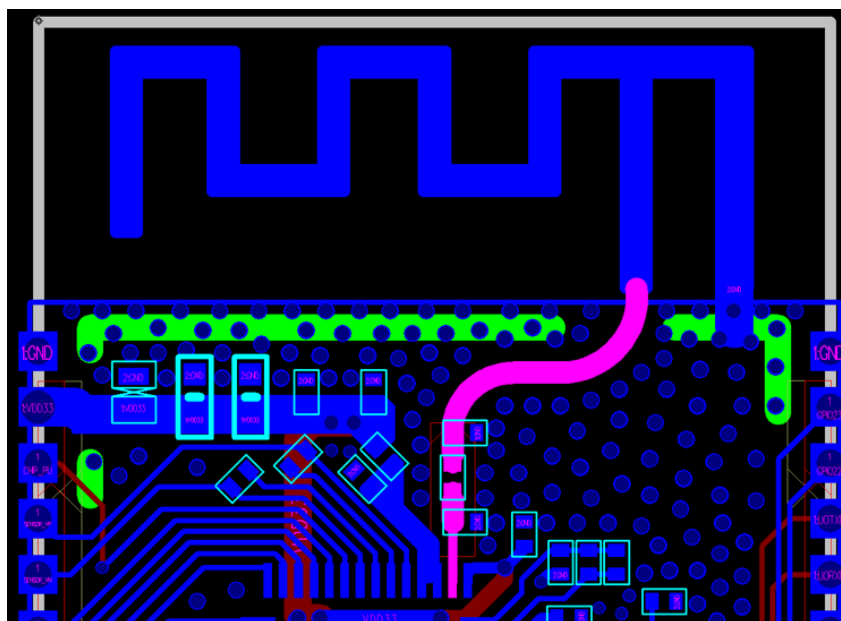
ESP32 RF Layout in a Two-layer PCB Design
